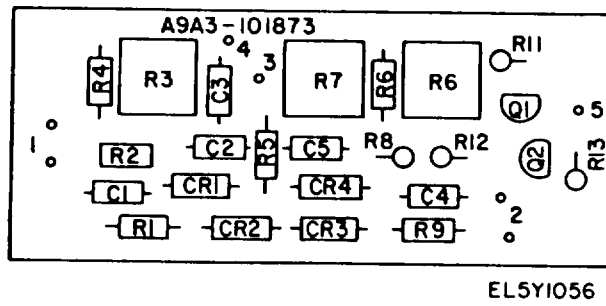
MODULATOR ASSEMBLY A9A3
